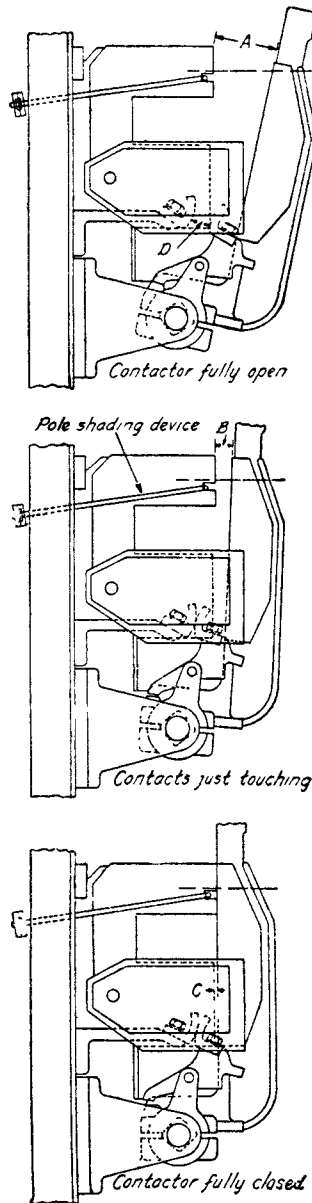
OUTLINE OF CONTACTOR UNITS, SHOWING CLEARANCES. (B.T.H. Co.)
